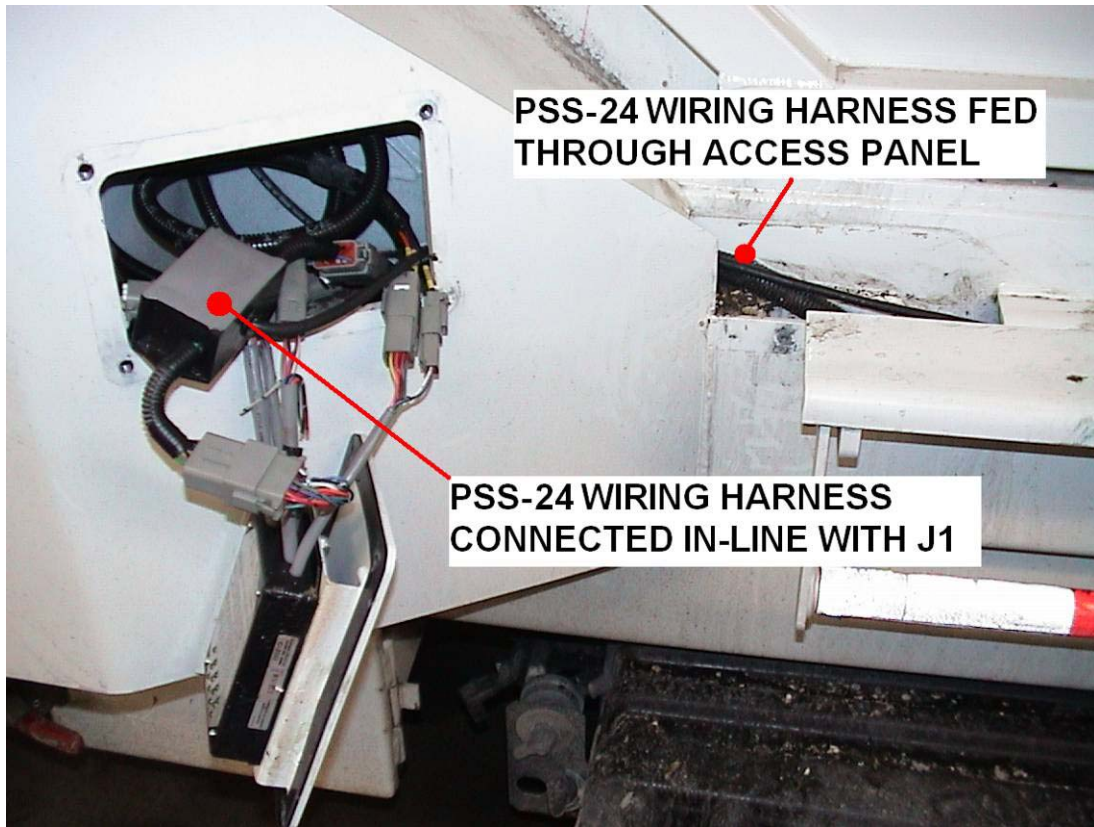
PSS-24 Wiring Harness Connection to Packer Control Module
